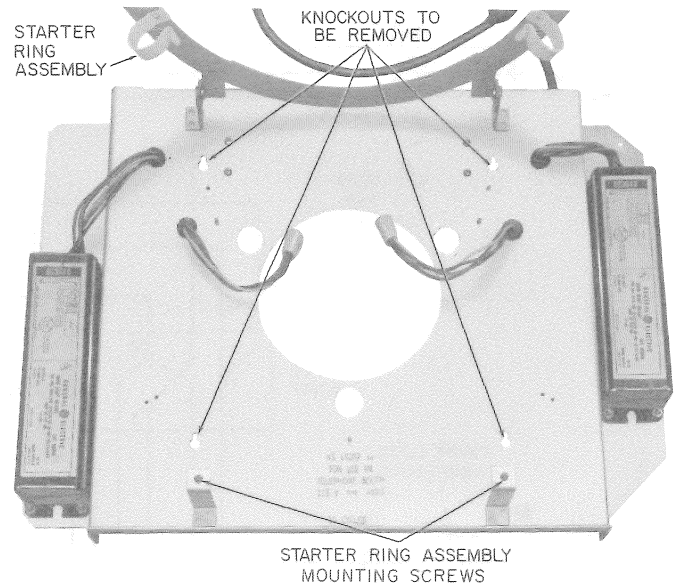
KS-19207 Light Fixture With Starter Ring Assembly in Raised Position
